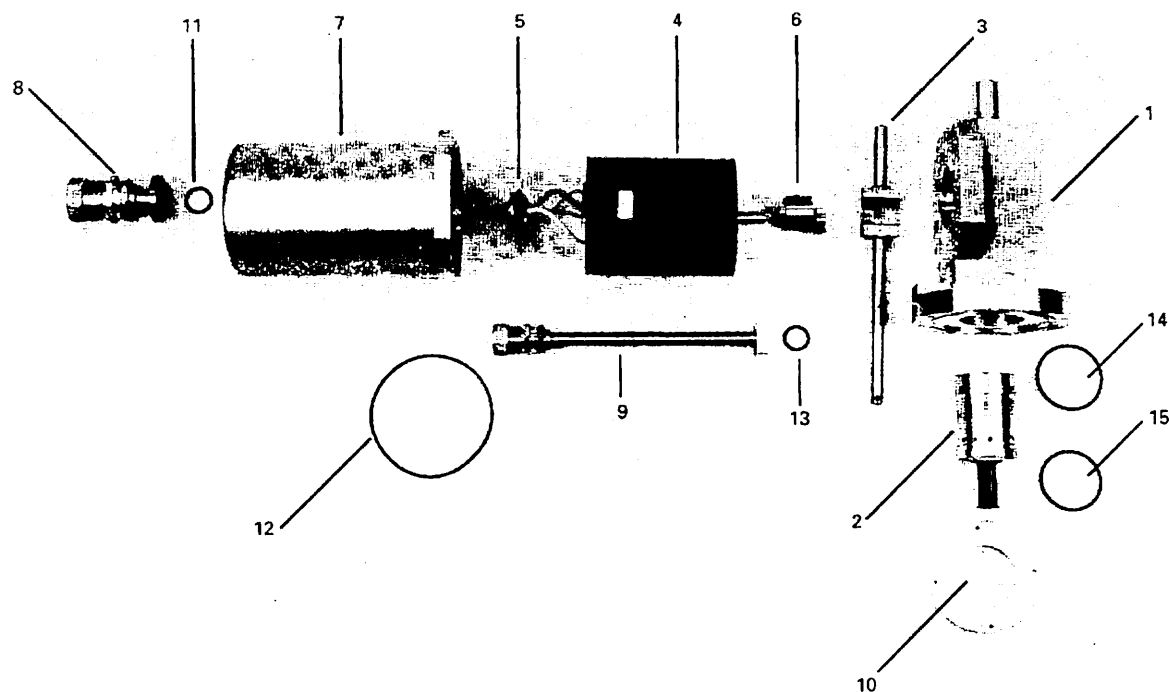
DRIVE UNIT ASSEMBLY (4.2GM, 445, 130 and 150)
